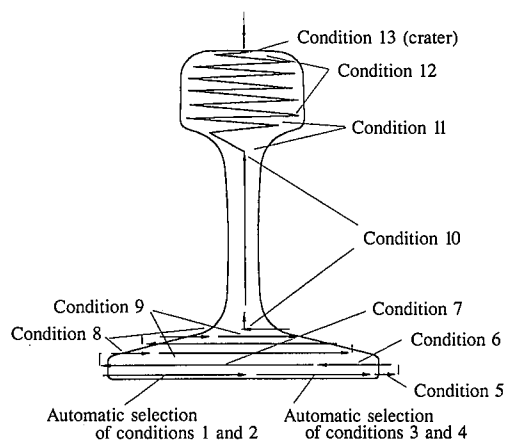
Electrode nozzle path and welding condition change regions
